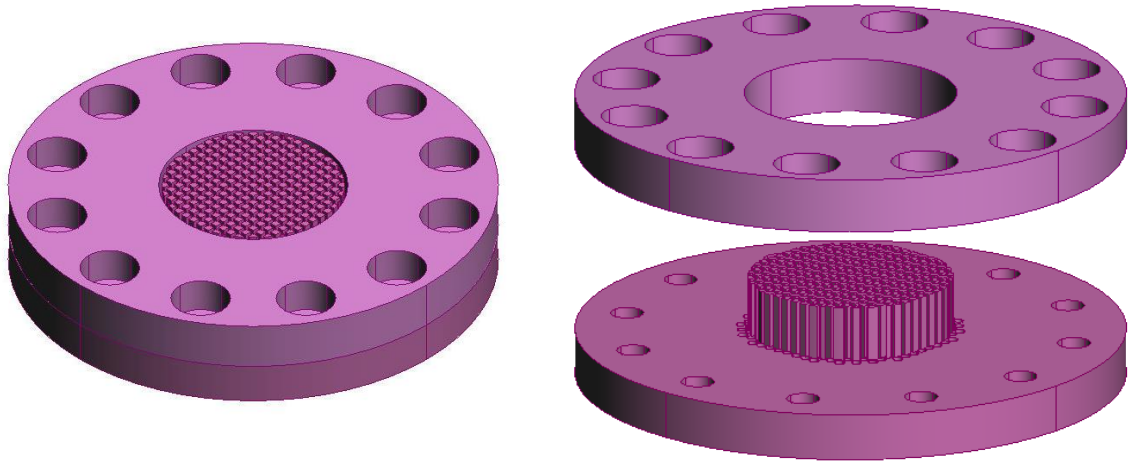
'Bath 2' extrusion die isometric and exploded views
